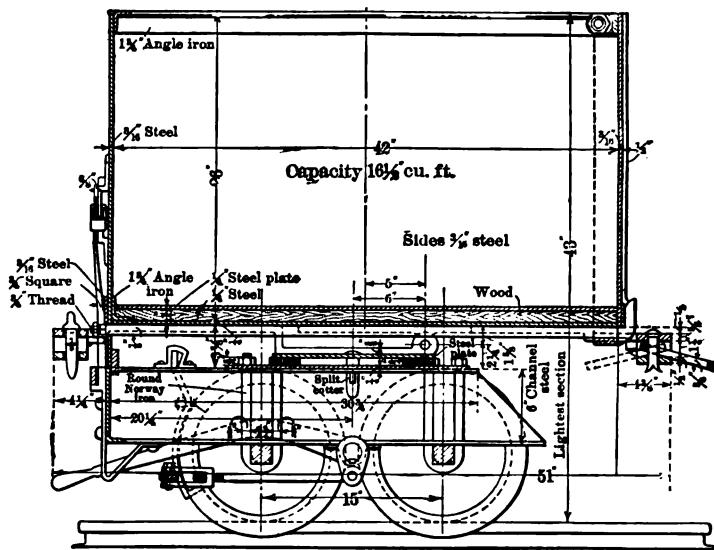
Elevation of tunnel car used in Laramie-Poudre tunnel.
